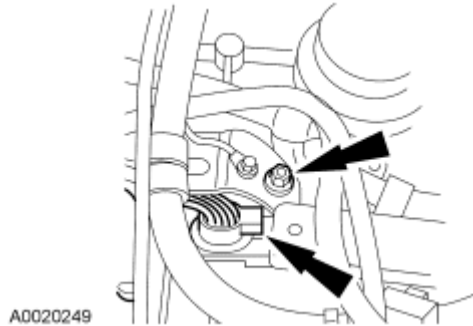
Locating Wire Harness Bracket Nut & Plug
